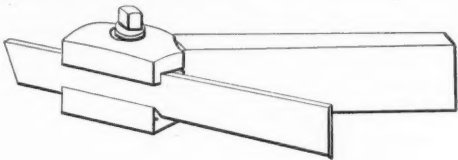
Western Straight and Offset Cutting-off Tool-holders.
